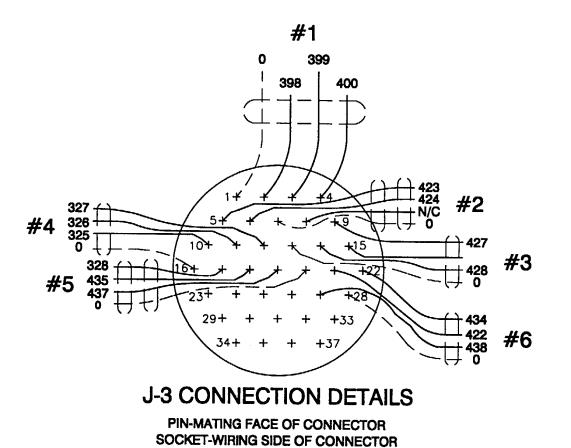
Starboard Receptacle "A5" Assembly. (Sheet 2 of 2).
